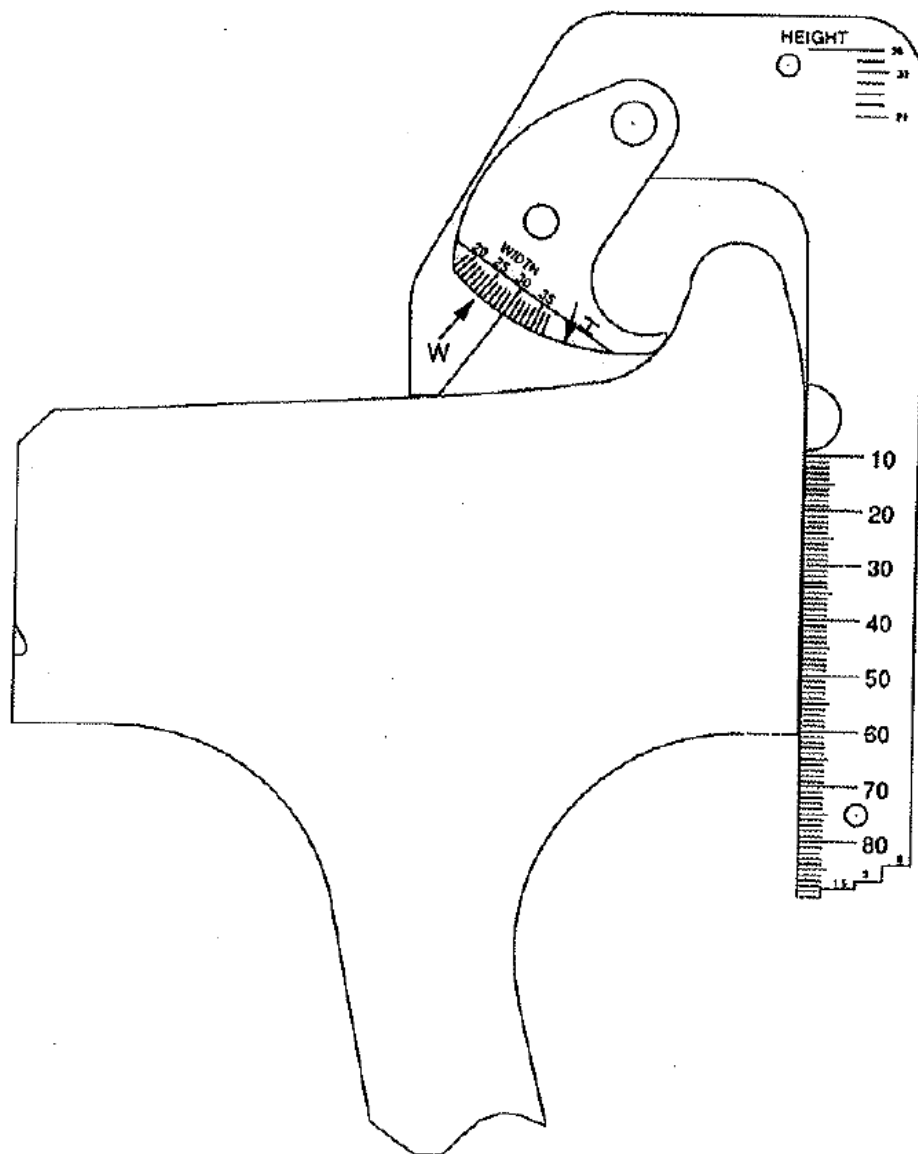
Measuring the flange width. (In this example, the flange width is 25mm.)
